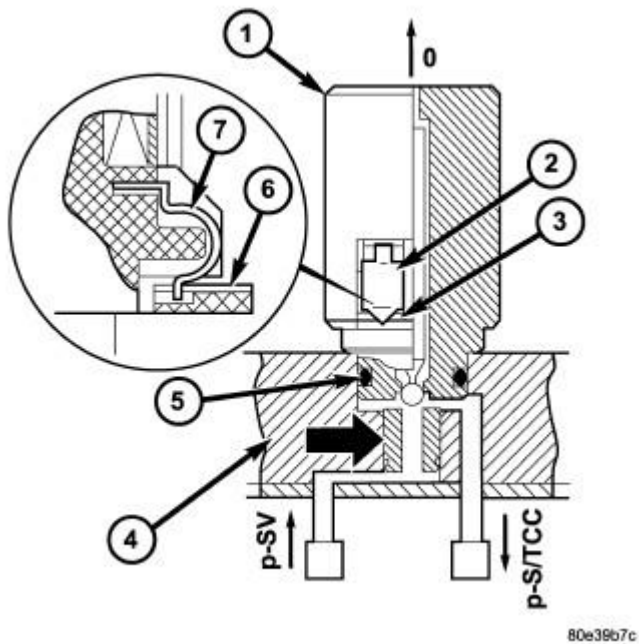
Torque Converter Lockup Clutch PWM Solenoid Valve
